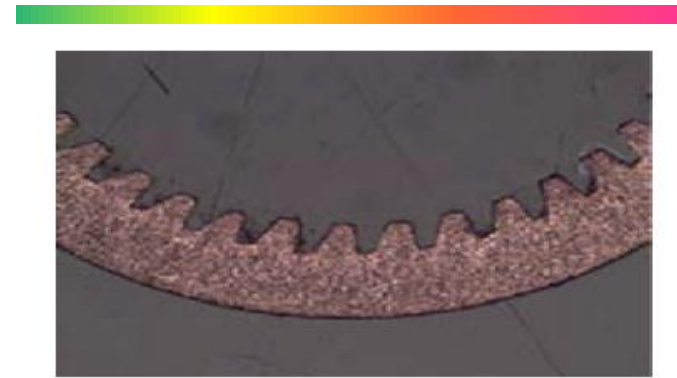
Enlarged view of cross-sectional shape of grooved tube.
